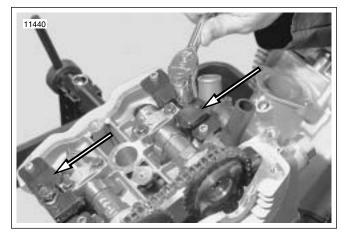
Tappet Compressing Tools (HD-45491) (typical)
